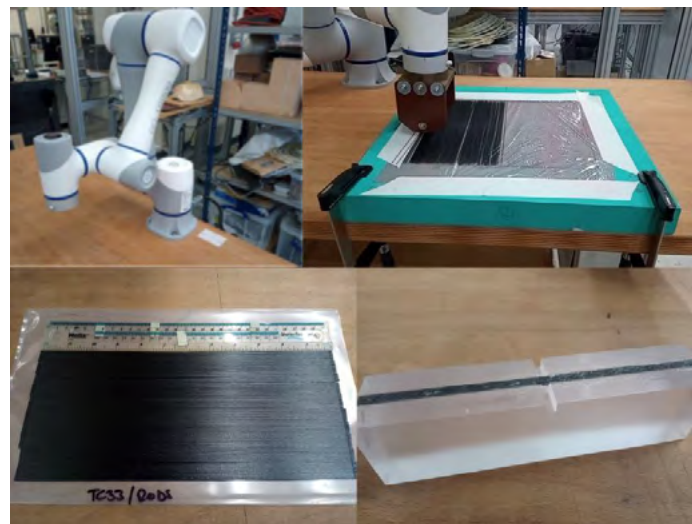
a) Dobot CR5 unit, b) Silicone roller in PLA housing, moving rods across tooling, c) Finished laminate section, d) Laminate sample adhered to four-point bending test cradle
